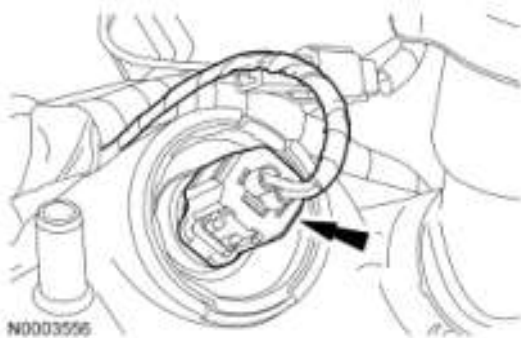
Locating Camshaft Timing (VCT) Solenoid Electrical Connectors
